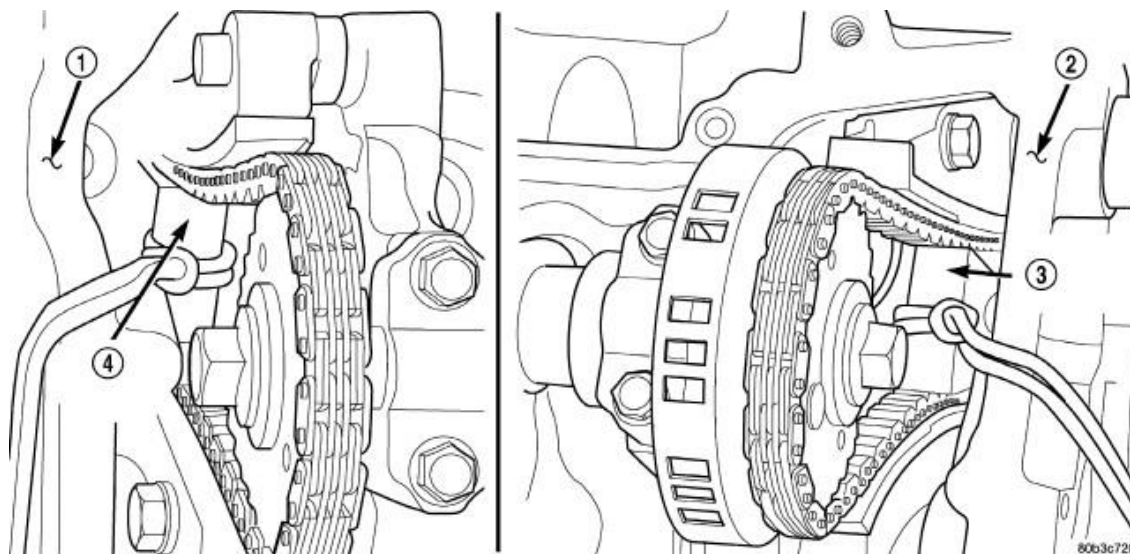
Securing Timing Chain Tensioners Using Timing Chain Wedge
